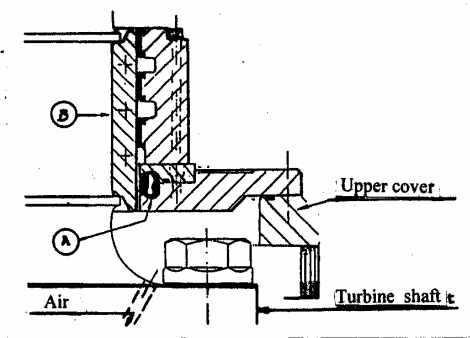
Shaft seal of a vertical Francis turbine /1/
